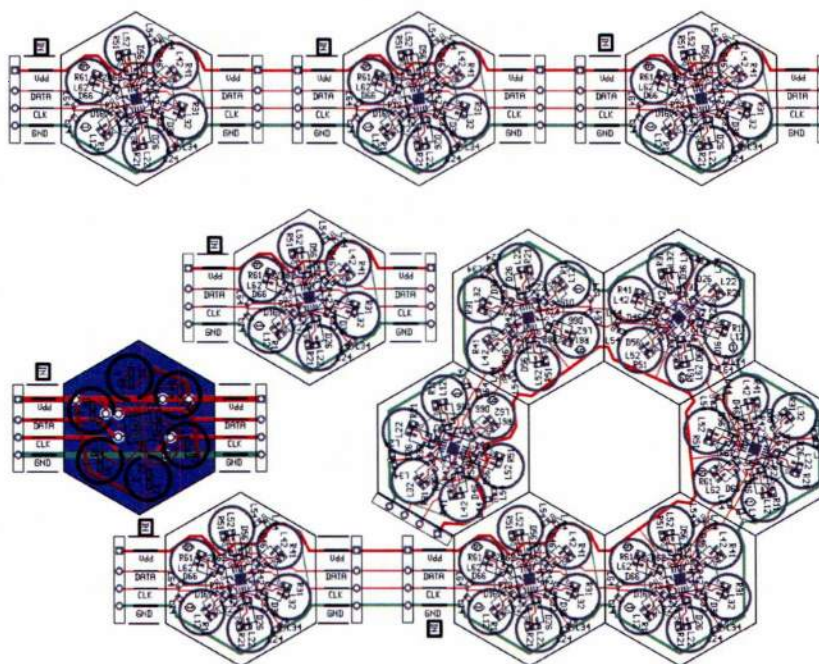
Fabricated PCB board layout, designed using the gEDA open-source electronics design package.
